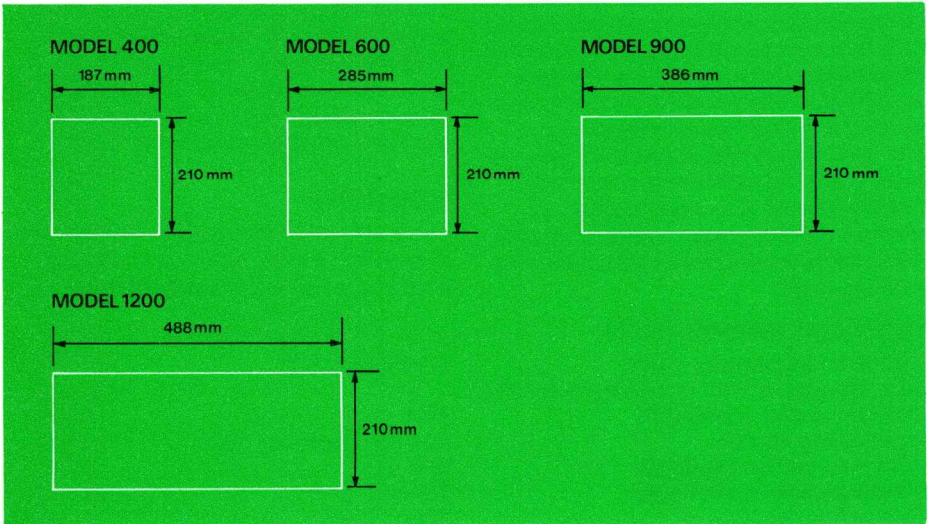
PANEL CUT-OUT – FLUSH MOUNTED PATTERN
